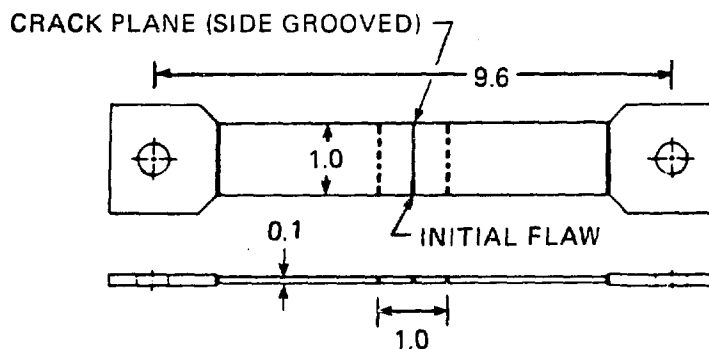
Wide-Plate crack-arrest specimen and pull-plate assembly
